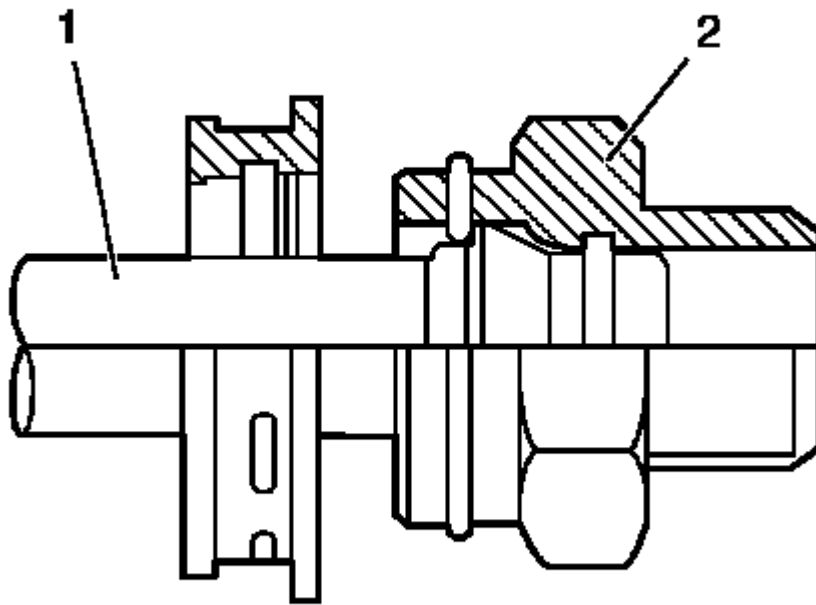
Cutaway View Of Automatic Transmission Oil Cooler Fitting
